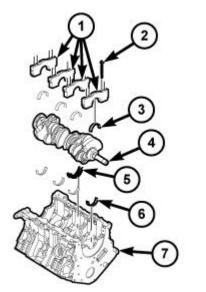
Main Bearing Caps, Bolts, Crankshaft & Engine Block Courtesy of CHRYSLER GROUP, LLC
